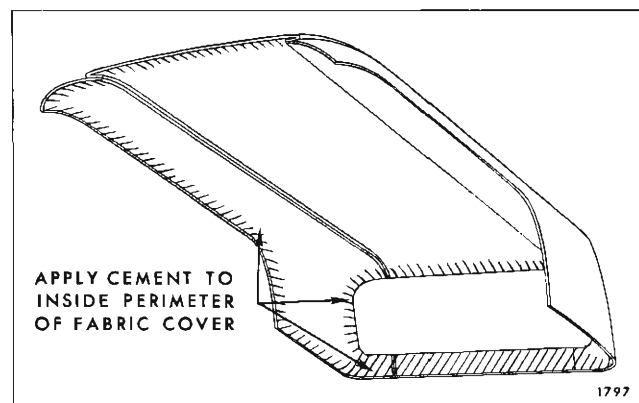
J2—Cementing of Fabric Roof Cover for Styles with Felt Pad
